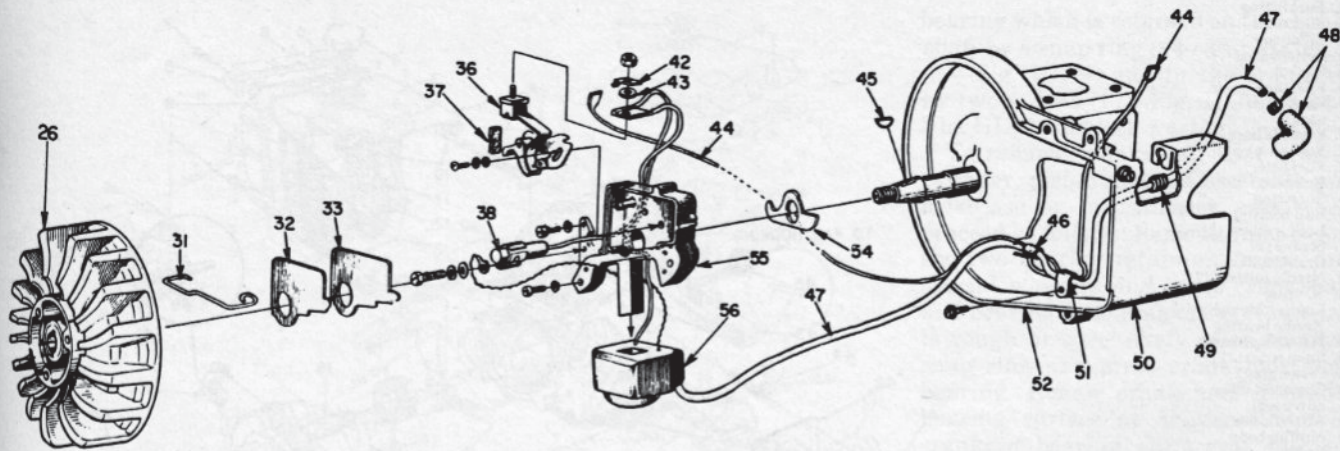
Exploded view of flywheel magneto assembly used on some models. Refer to Fig. HL57 for magneto which is also used on some models.
